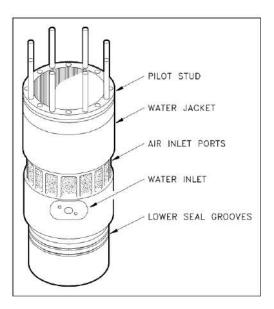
Diesel Engine Cylinder Bore Source: (Gedeon, 2019)
